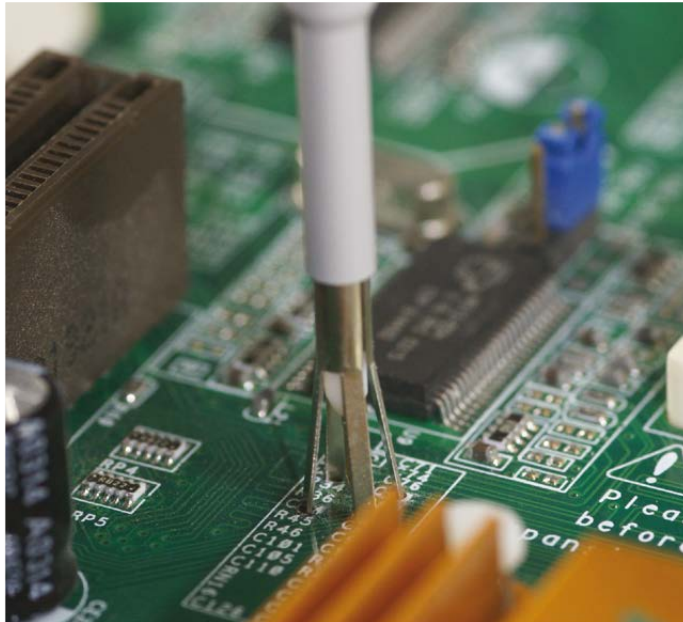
The Keysight N2885A PCB adapter sockets are designed to solder into a printed circuit board (PCB) as test points to minimize ground inductance and maximize signal fidelity. This package contains 25 sockets.
